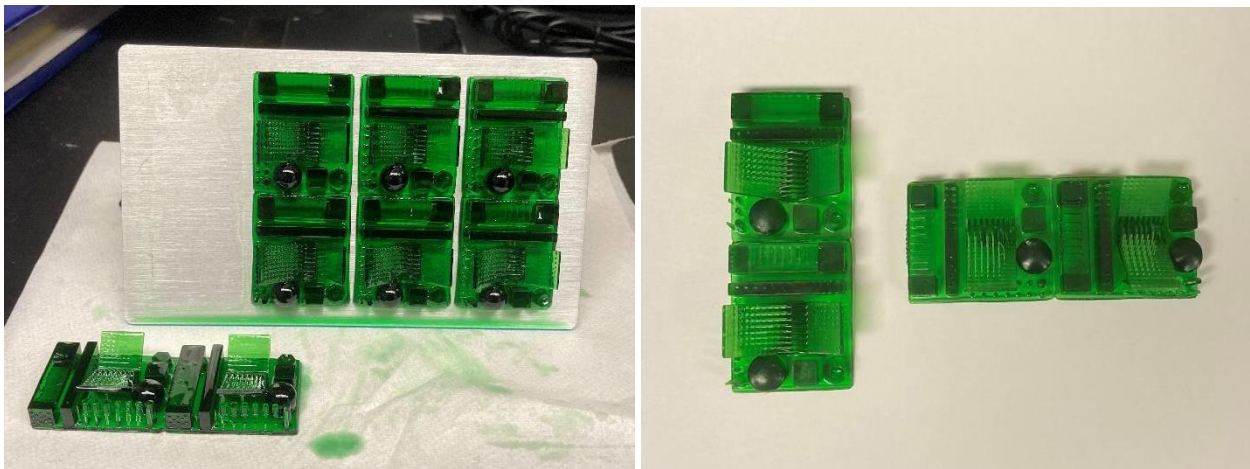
First test run of the printer during the set-up phase, using the provided printer resin and test file, using the default printer settings. The printed object here was considered to be successful.
